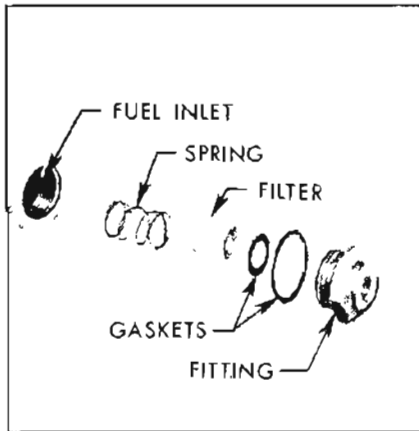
V-6 Engine Carburetor Fuel Filter
